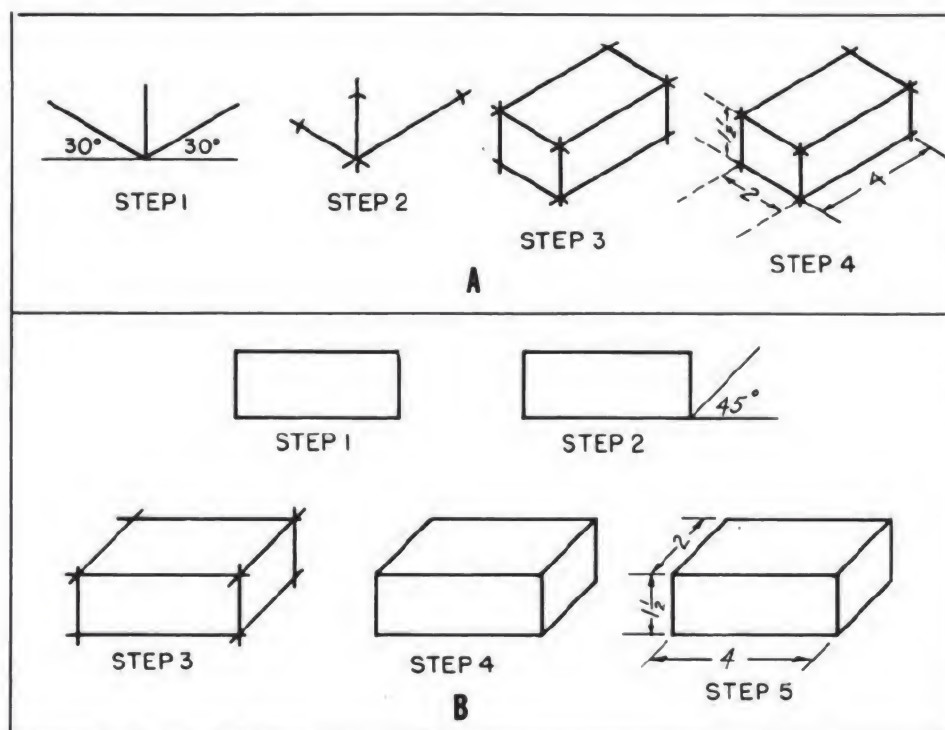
Sketching a rectangular block. (A) Isometric; (B) Oblique.
